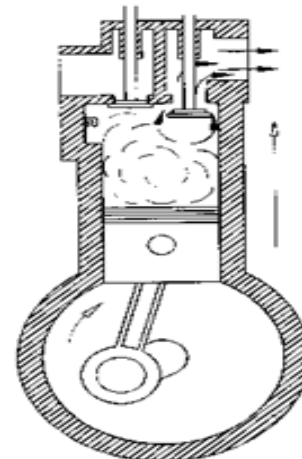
Working of 2nd Half Rotation of Crank Shaft
